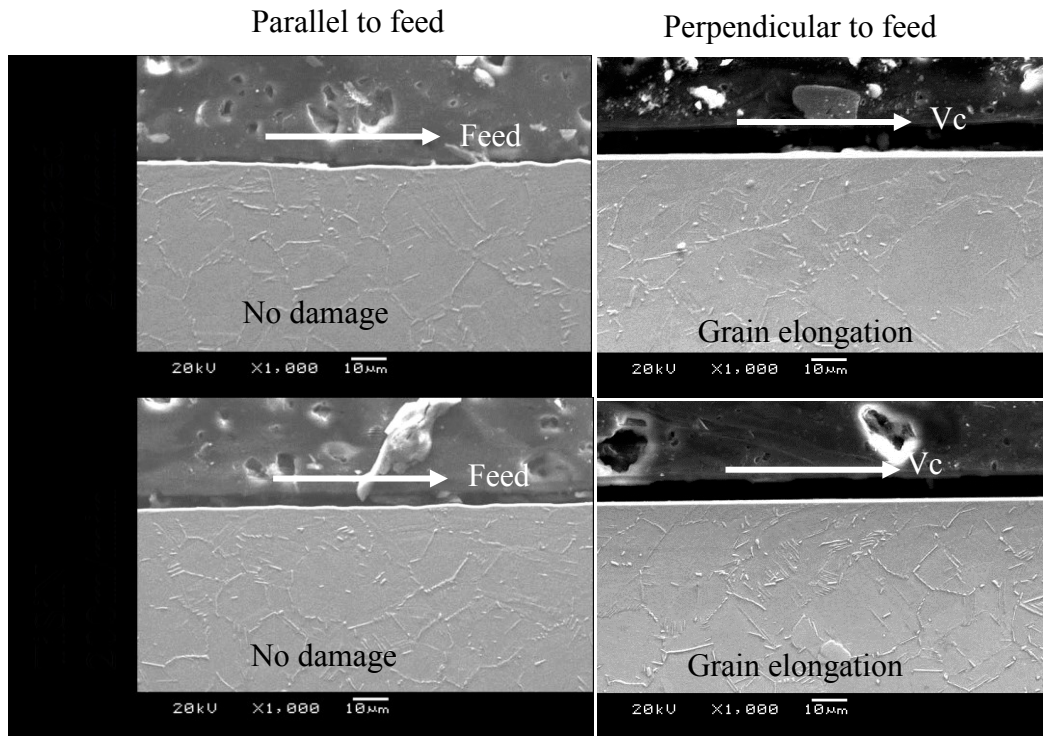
Cross-sectional SEM images of machined workpiece sub-surface produced with worn uncoated and TiSiN coated tools at cutting speed of 200m/min
